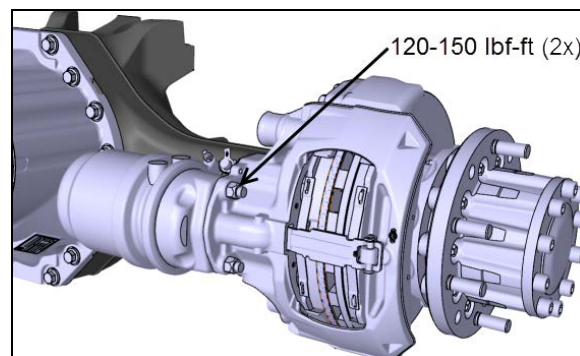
TYPICAL AIR CHAMBER MOUNTING NUTS TORQUE – ZF A132 DRIVE AXLE SHOWN
